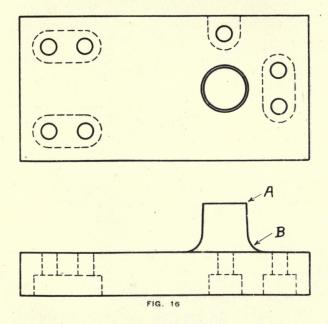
represents a molded base with a projection "A" and numerous counterbored holes. A piece of this design is readily molded of the hot molded materials "A," "E," "F" and "G," also of the ceramic materials, Class "D." It can also be molded of materials of Classes "B" and "C," if certain changes in design are made.
